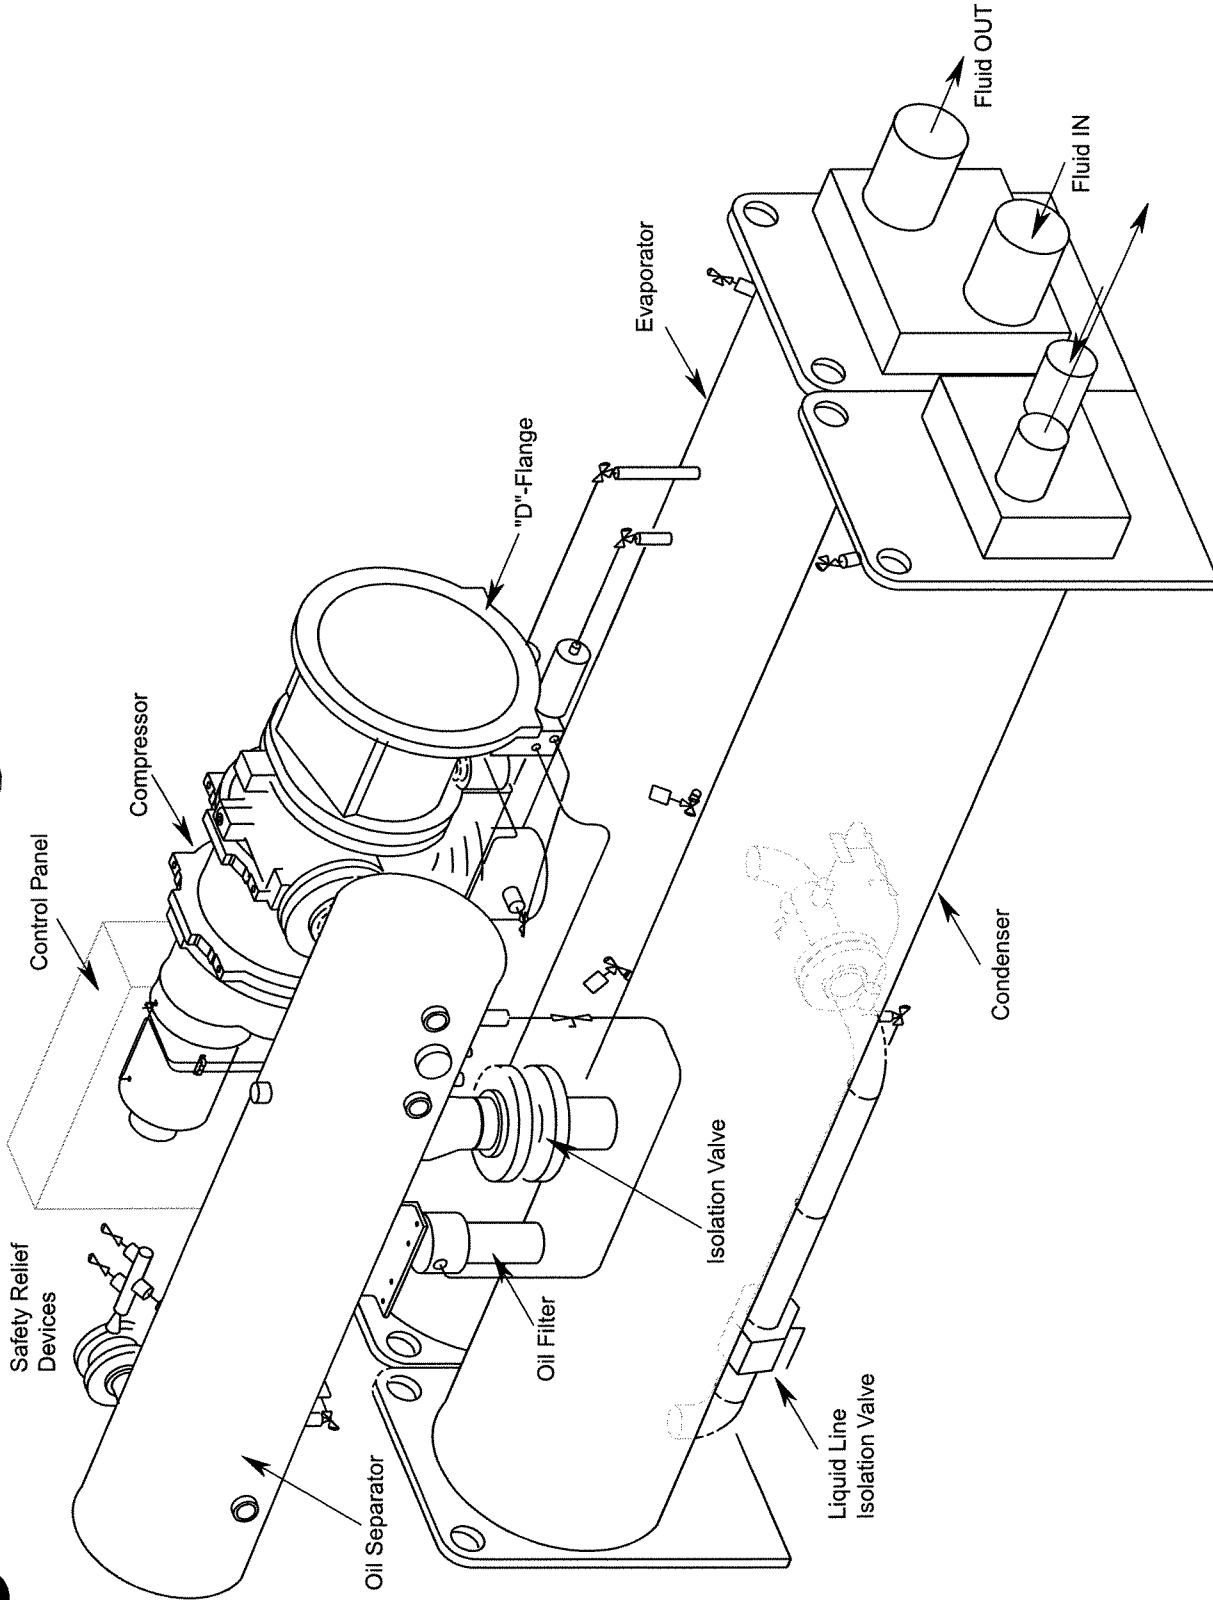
YS SCREW CHILLER COMPONENT LAYOUT DRAWING – DESIGN LEVEL "E"
